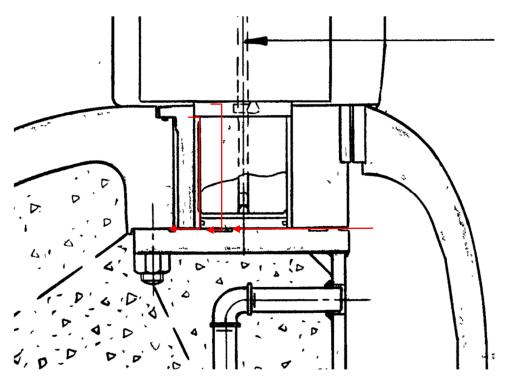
Leakage Paths to Stay Ring and Discharge Ring Flange
